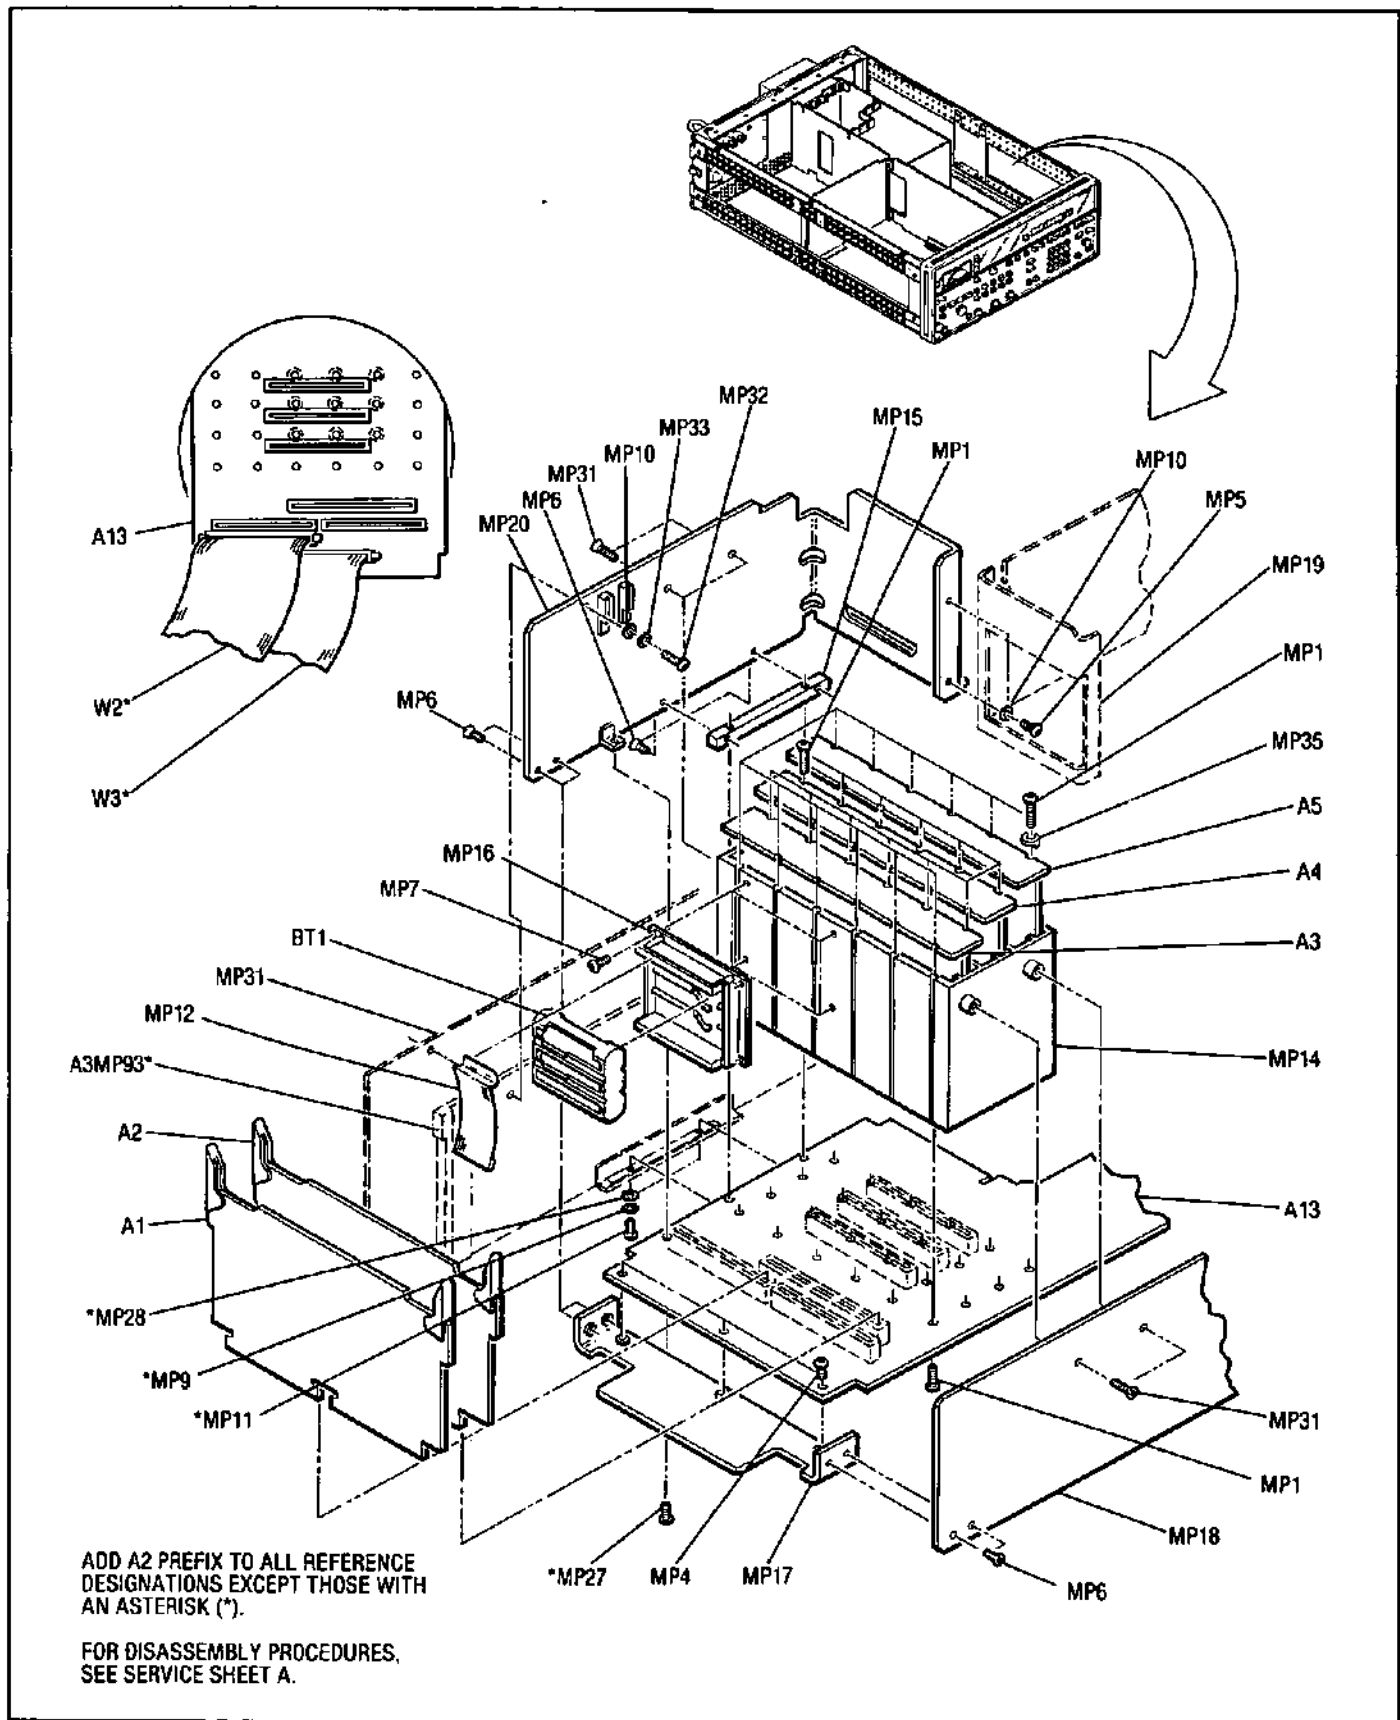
P/O A2 Controller Assembly Illustrated Parts Breakdown
